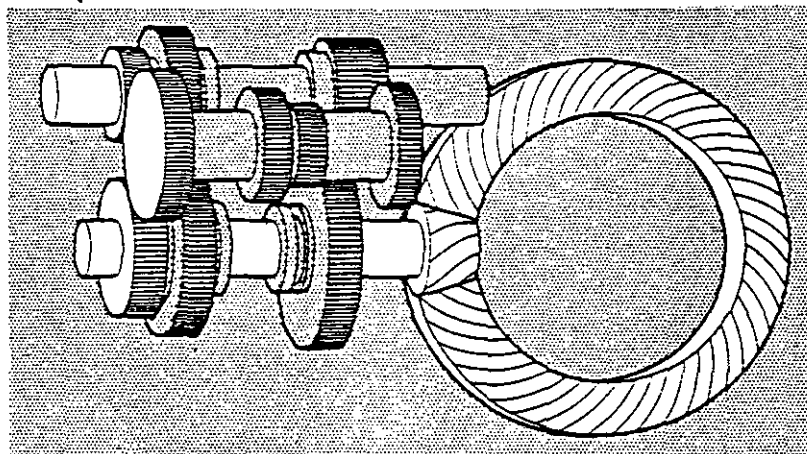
GEAR TRAIN: Top Gear — Low Ratio
